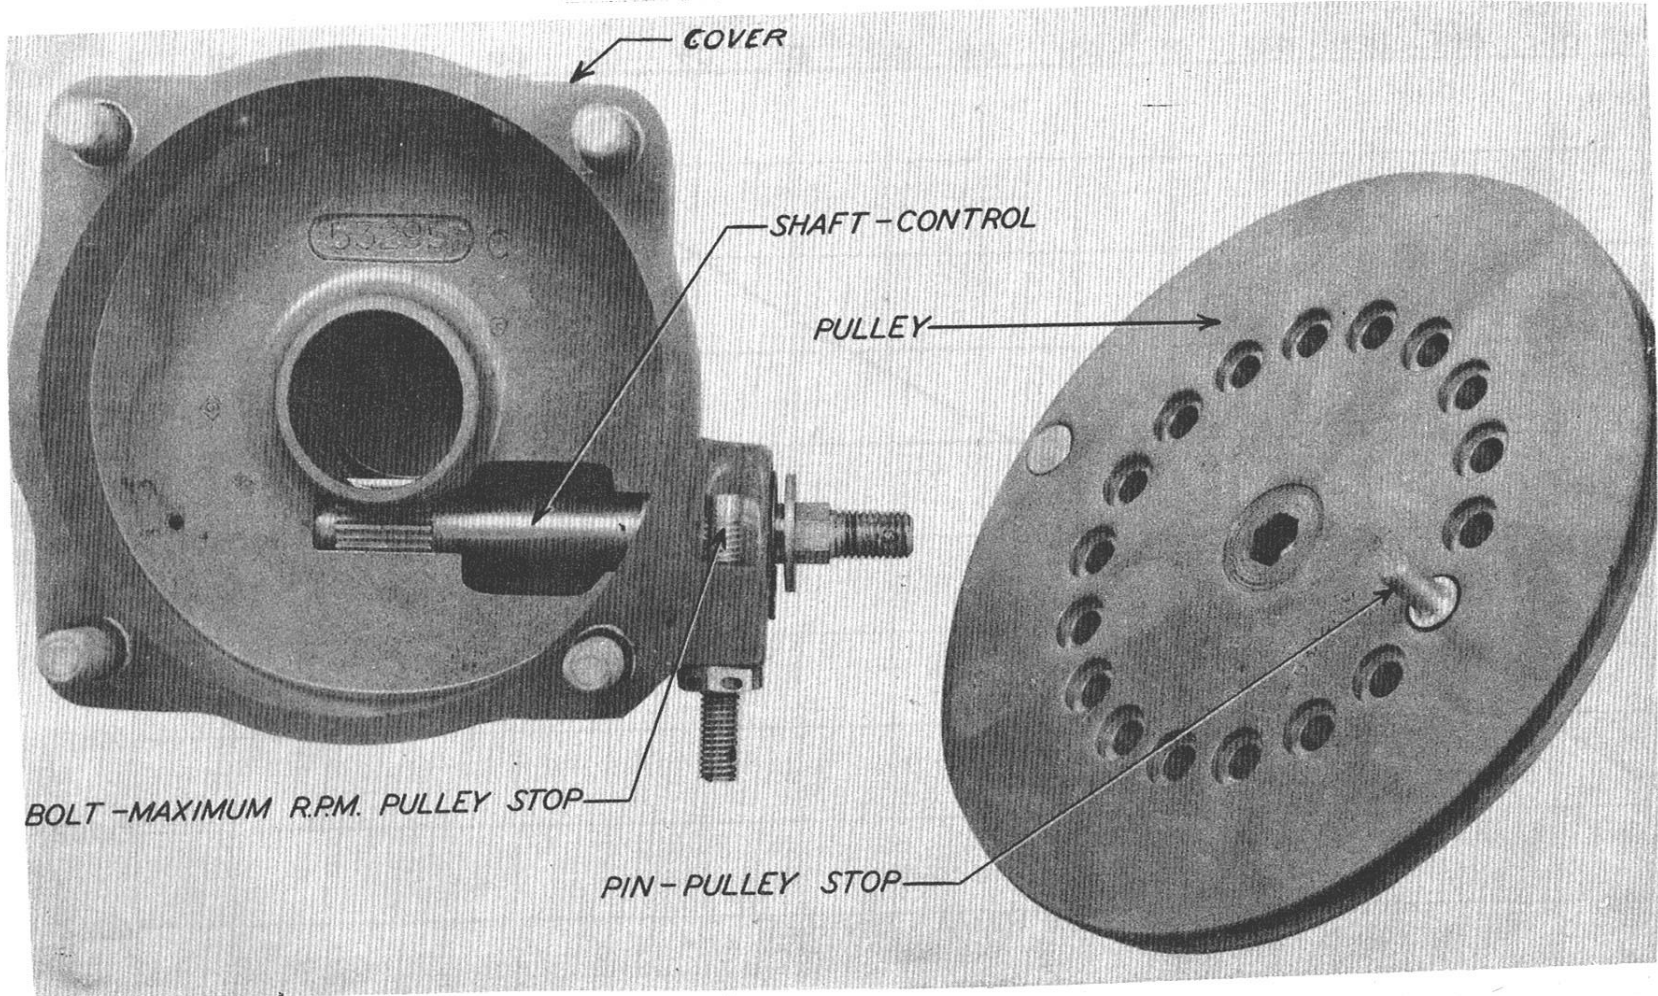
COVER ASSEMBLY WITH PULLEY STOP PIN
